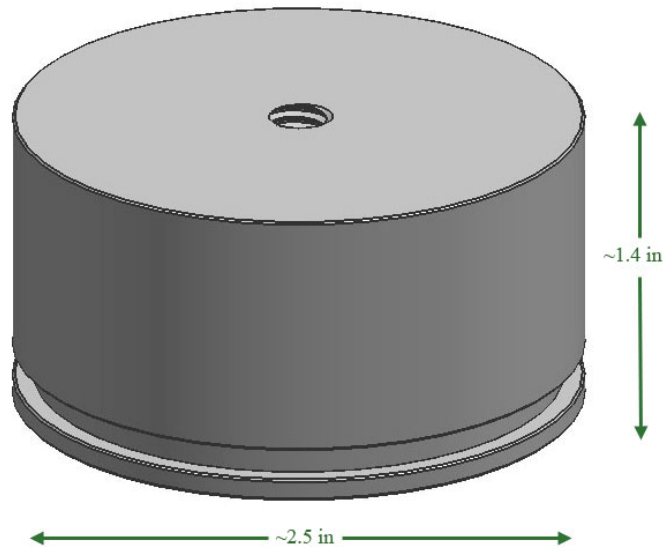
The Piston has a partially threaded thru hole for the Piston Stud as well as a groove for an O-ring
